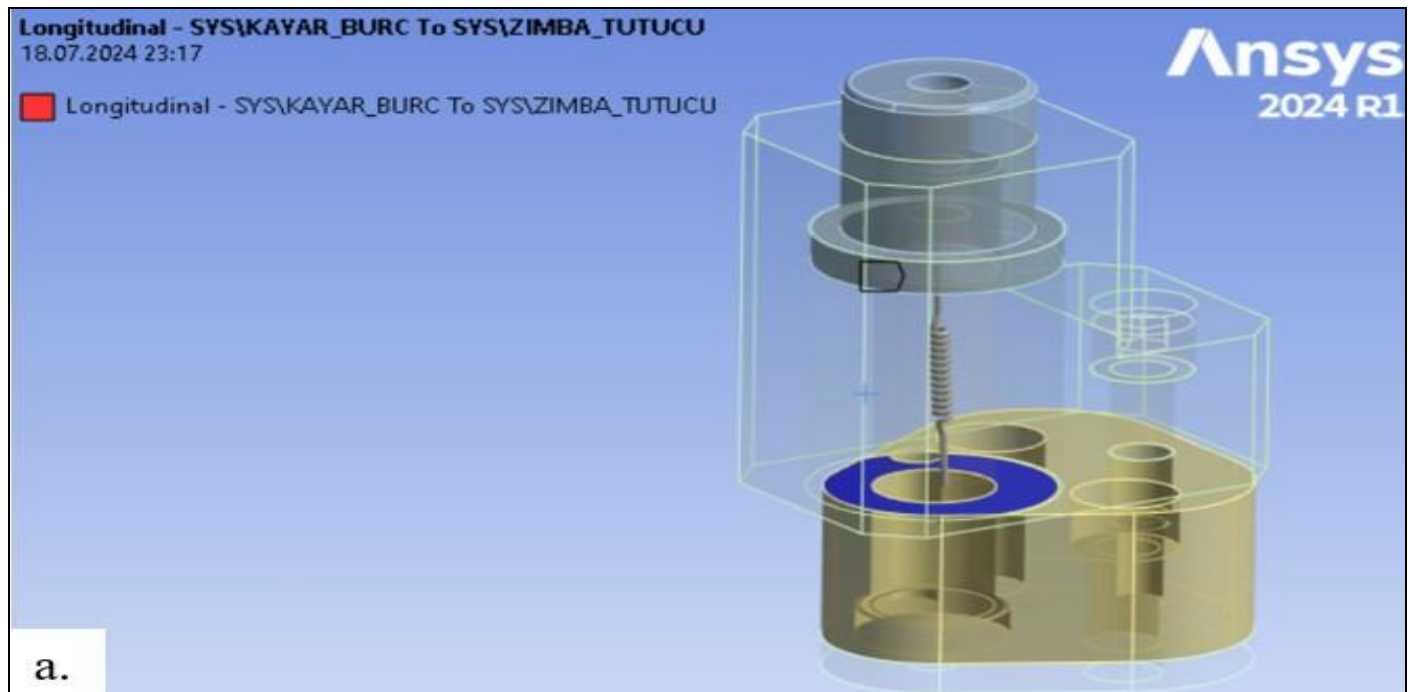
Spring Contact of the L-Shaped Punch Holder Mechanism
